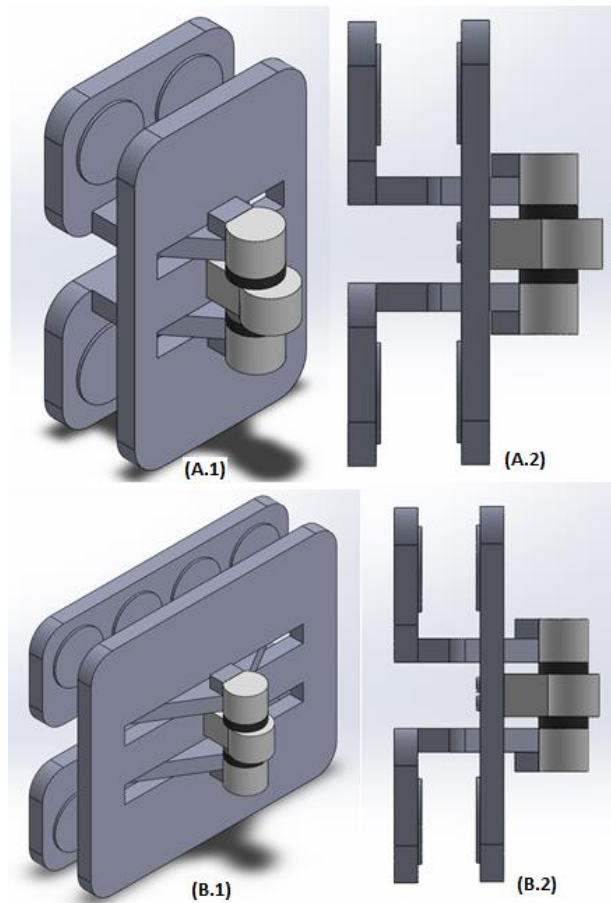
Anterior Test Fixture Design (Parallel Spring Configurations) - The tan pieces represent the Delrin vertebrae, the large gray plates are steel plates, and the black pieces are the Teflon discs needed for the intervertebral disc space. The springs are in contact with the front plate and two back plates. The superior and inferior vertebrae will be fixed in position with upper and lower mounts. Parts (A.1) and (A.2) are the isometric and side views, respectively, of the 2-spring parallel system, while parts (B.1) and (B.2) are the isometric and side views, respectively, of the 4-spring parallel system. The number associated with the parallel spring system refers to the number of springs which are acting on either the superior or inferior vertebrae.
